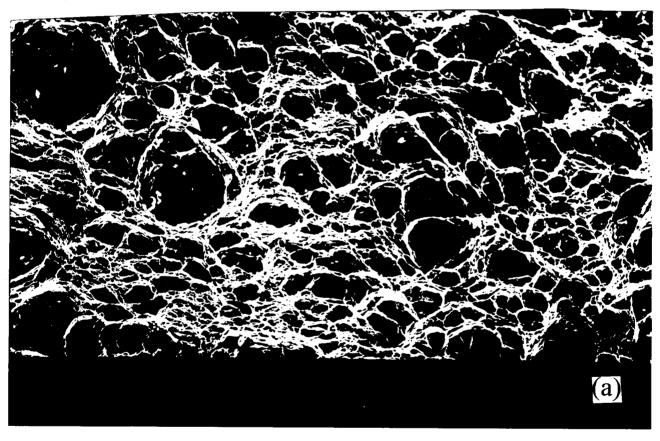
Typical fractograph showing major and minor dimples on the fracture plane in the thermomechanically treated sample.
